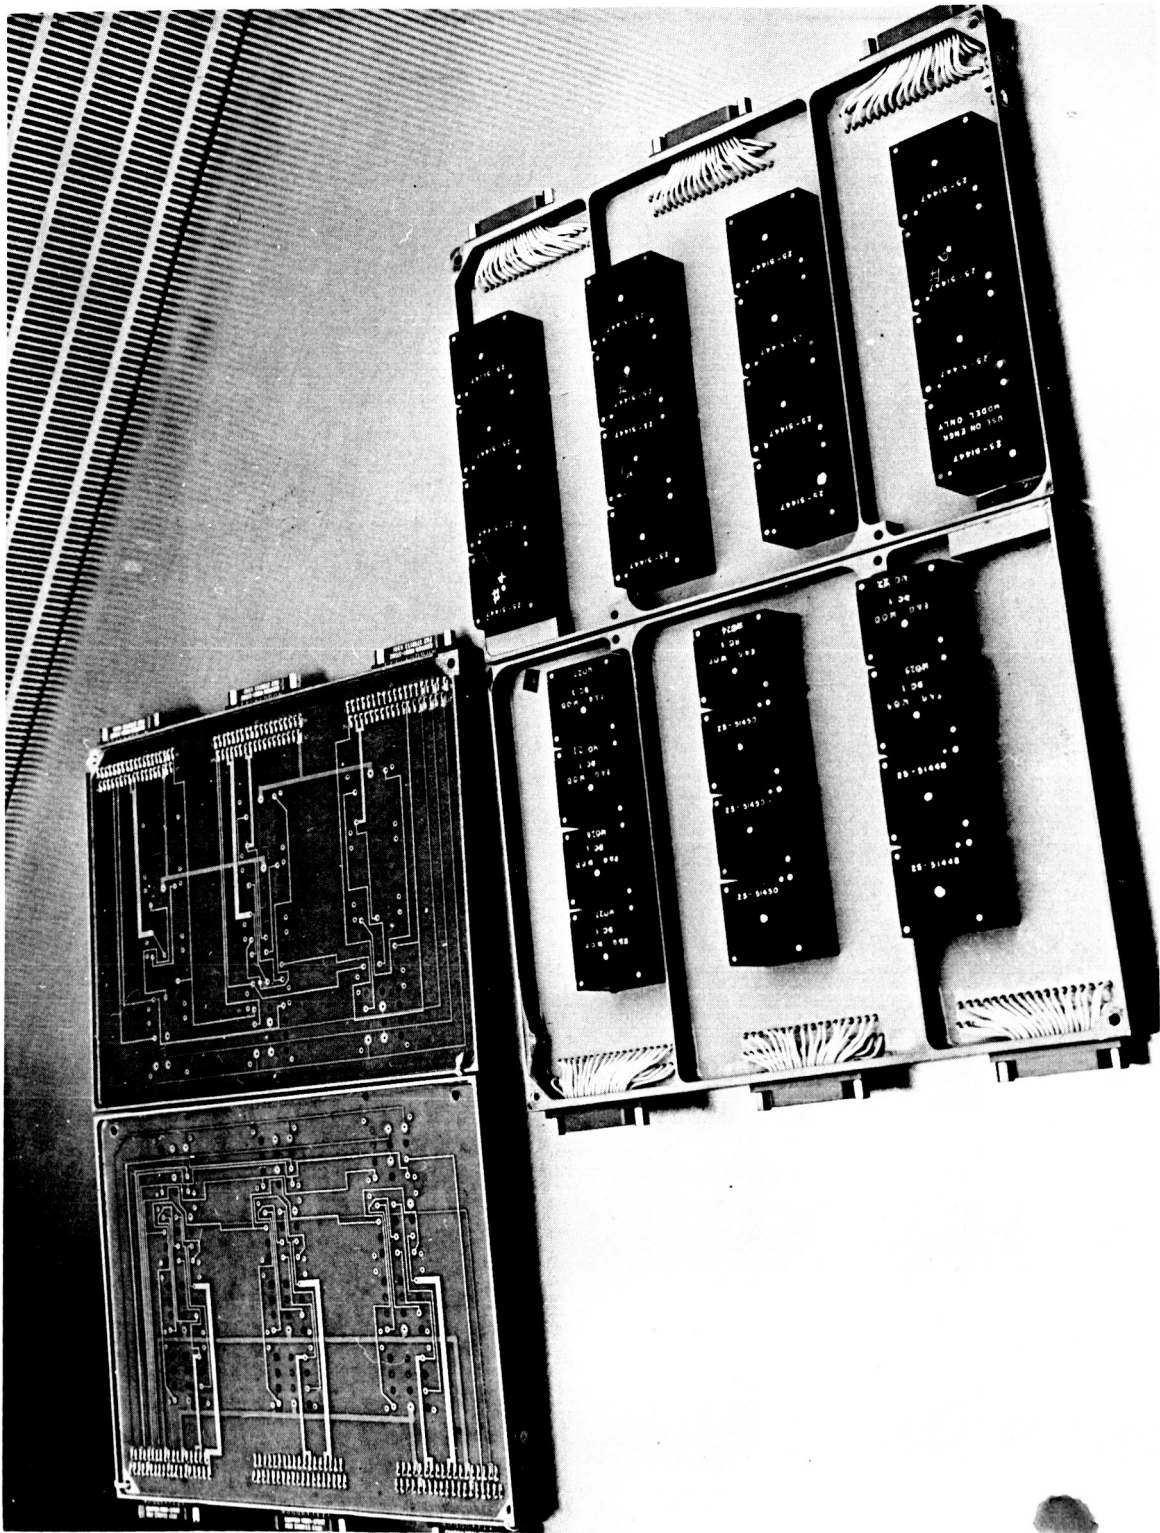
13: Lunar Orbiter — Module Board Assembly
